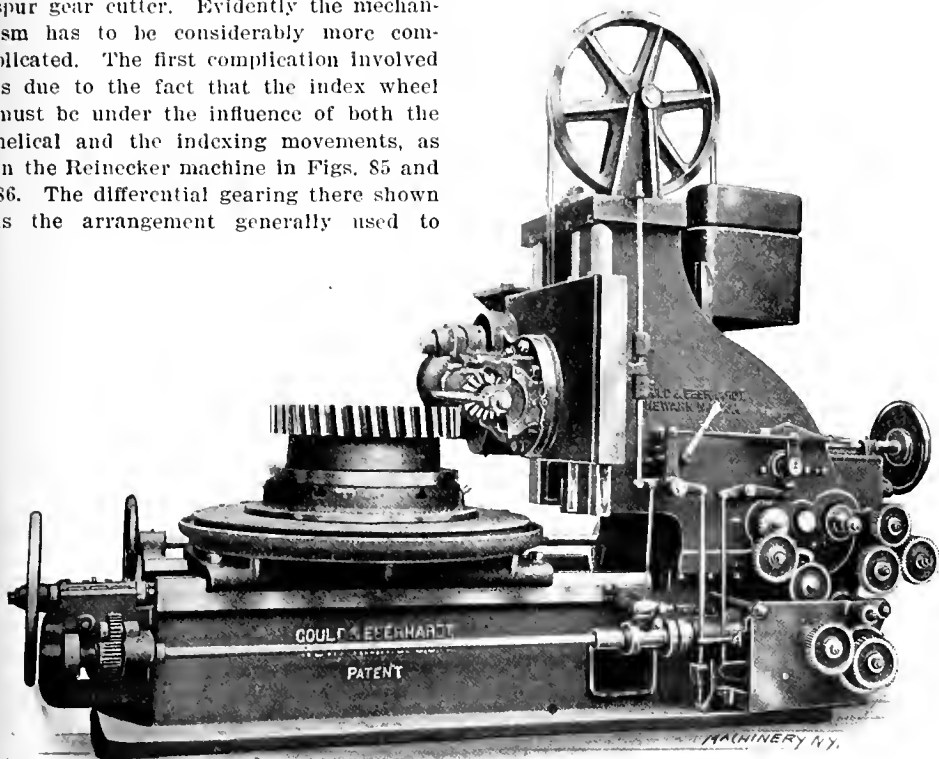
Automatic Helical Gear-cutting Machine, made by Gould & Eberhardt.
